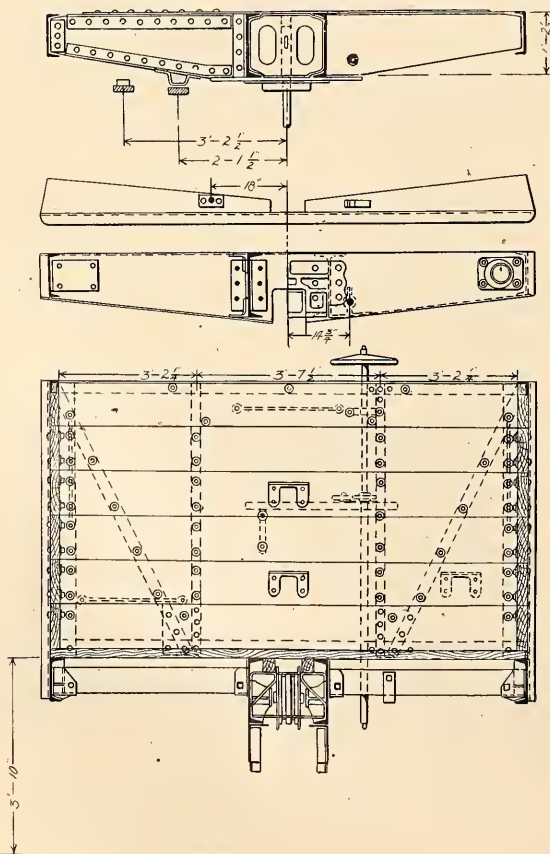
END ELEVATION, END SILL AND BOLSTER OF HOPPER CAR WITH STEEL UNDERFRAMING.
